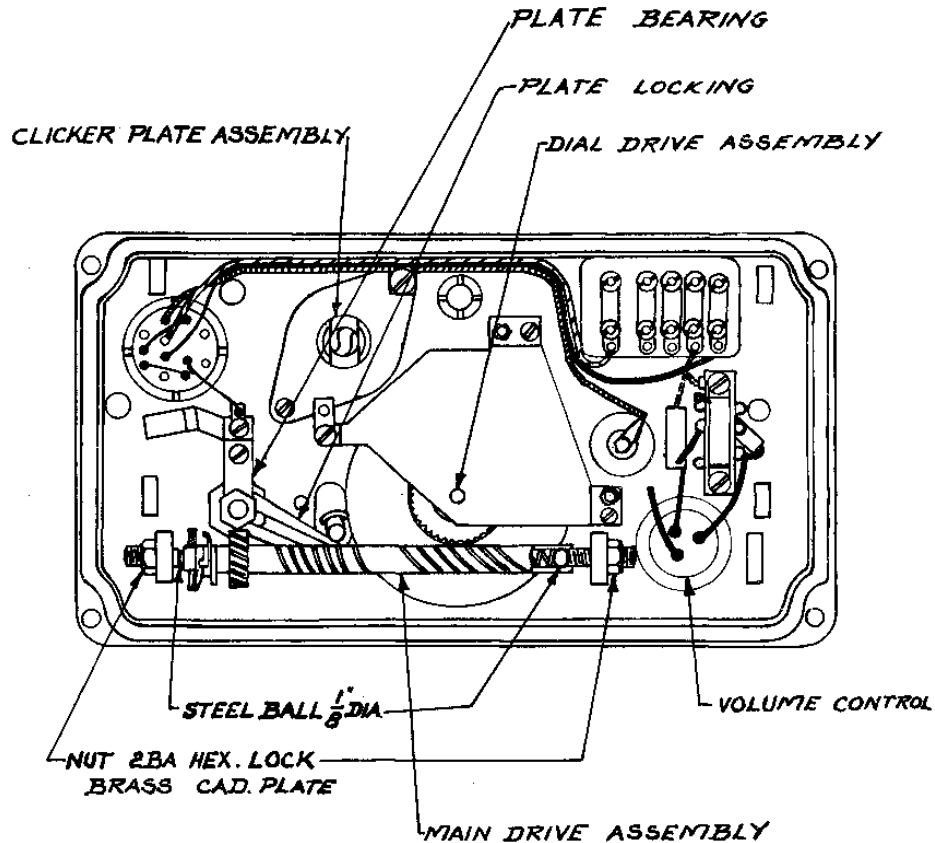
FRONT PANEL SHOWING MAIN DRIVE ASSEMBLY
